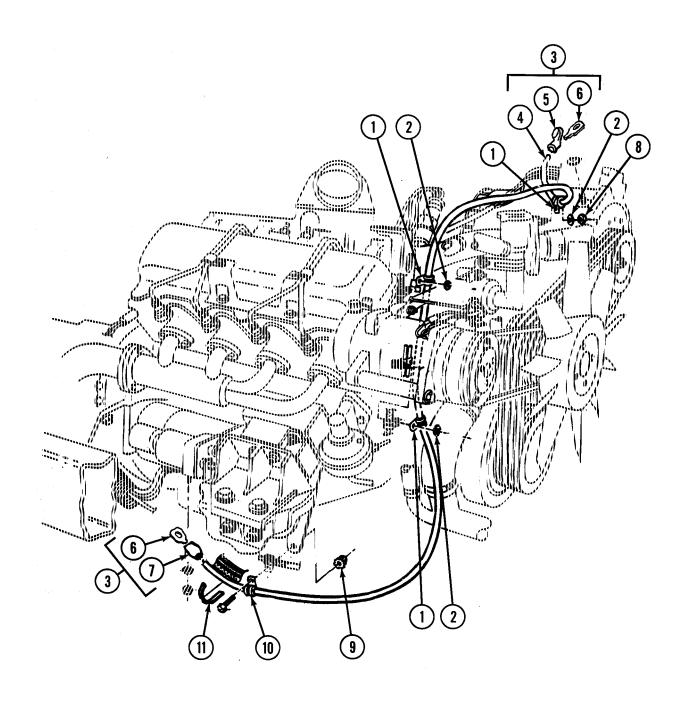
EES Kit, 200 Amp Alternator Cable Assembly
